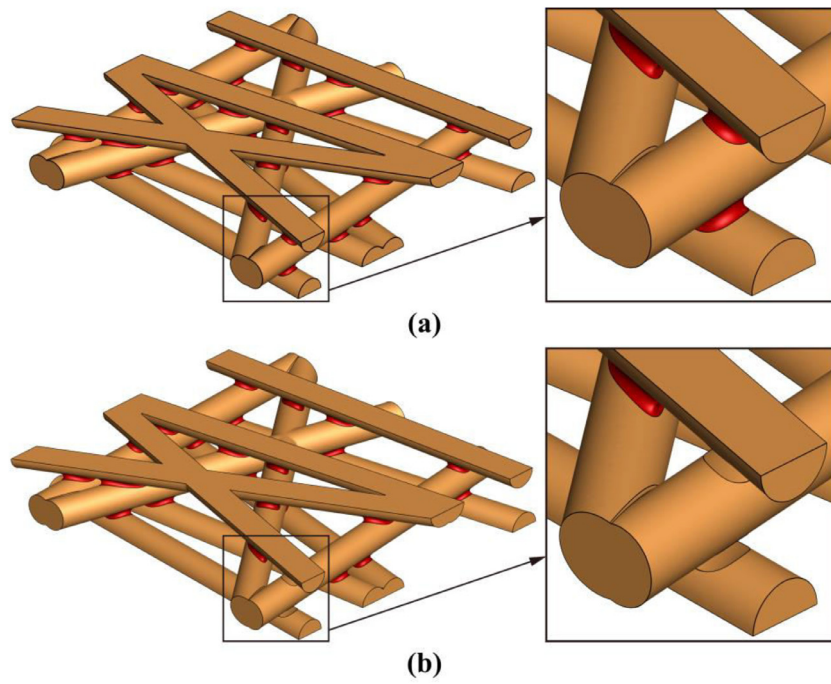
Solder joint diagram: (a) complete solder joints; (b) solder joint skips.
